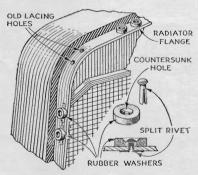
Washers cut from a rubber cork can be used to prevent the rattle caused by the radiator shell striking the hood
